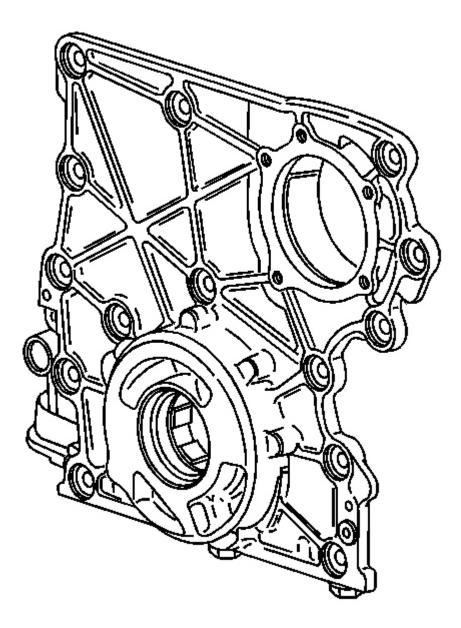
View Of Engine Front Cover Courtesy of GENERAL MOTORS CORP.
